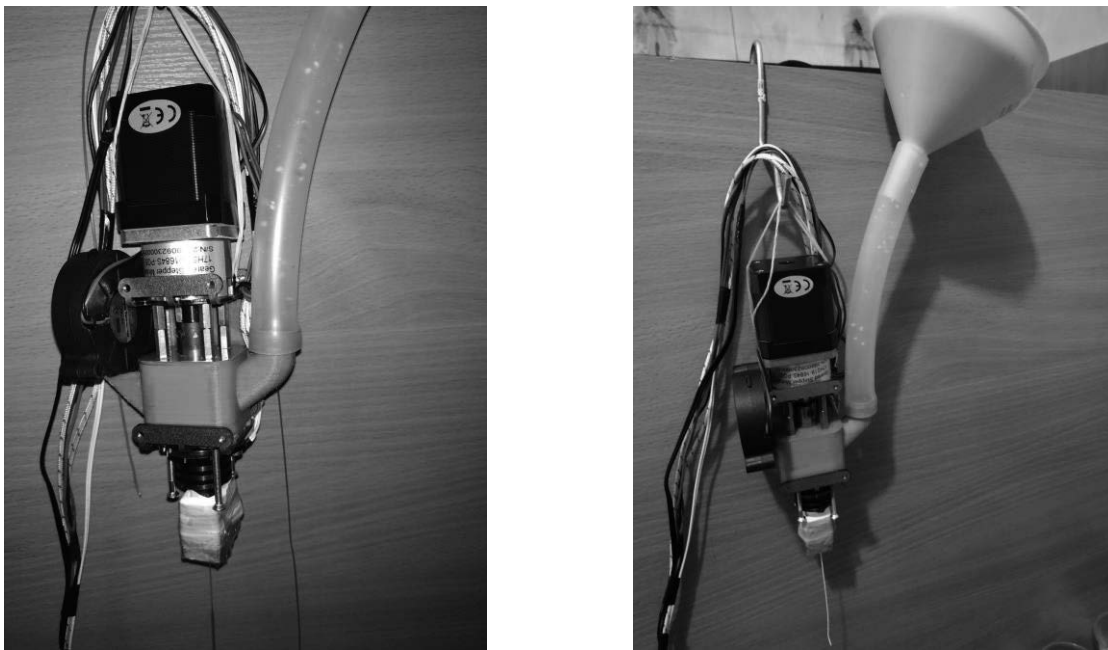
Developed extruder 3D printer for printing with crushed polymers
